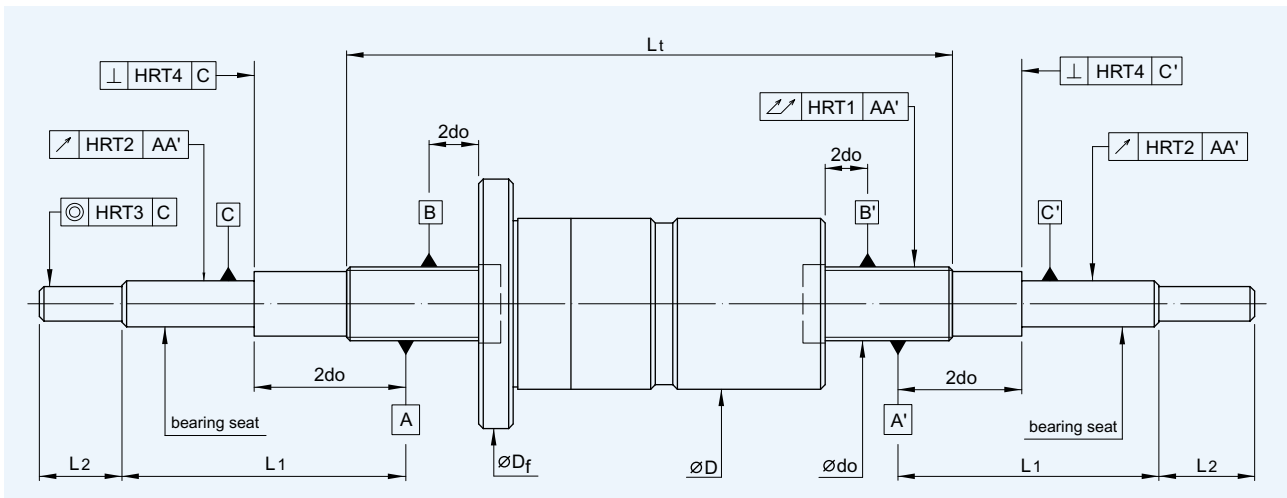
Geometric tolerance of HIWIN high precision rolled ballscrew
